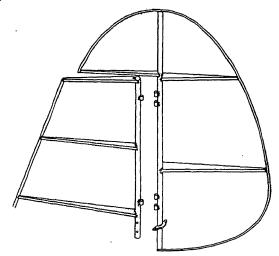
Welded-steel-tube fin and rudder.
